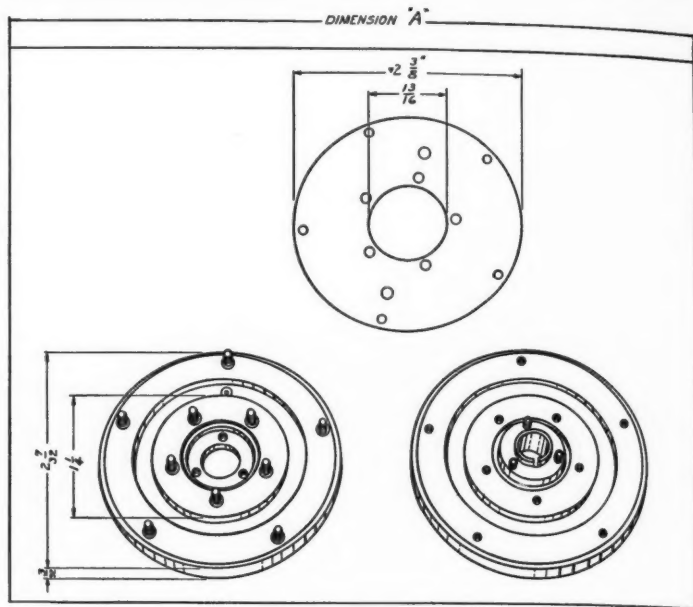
An inked outline is drawn on the photostatic enlargement
